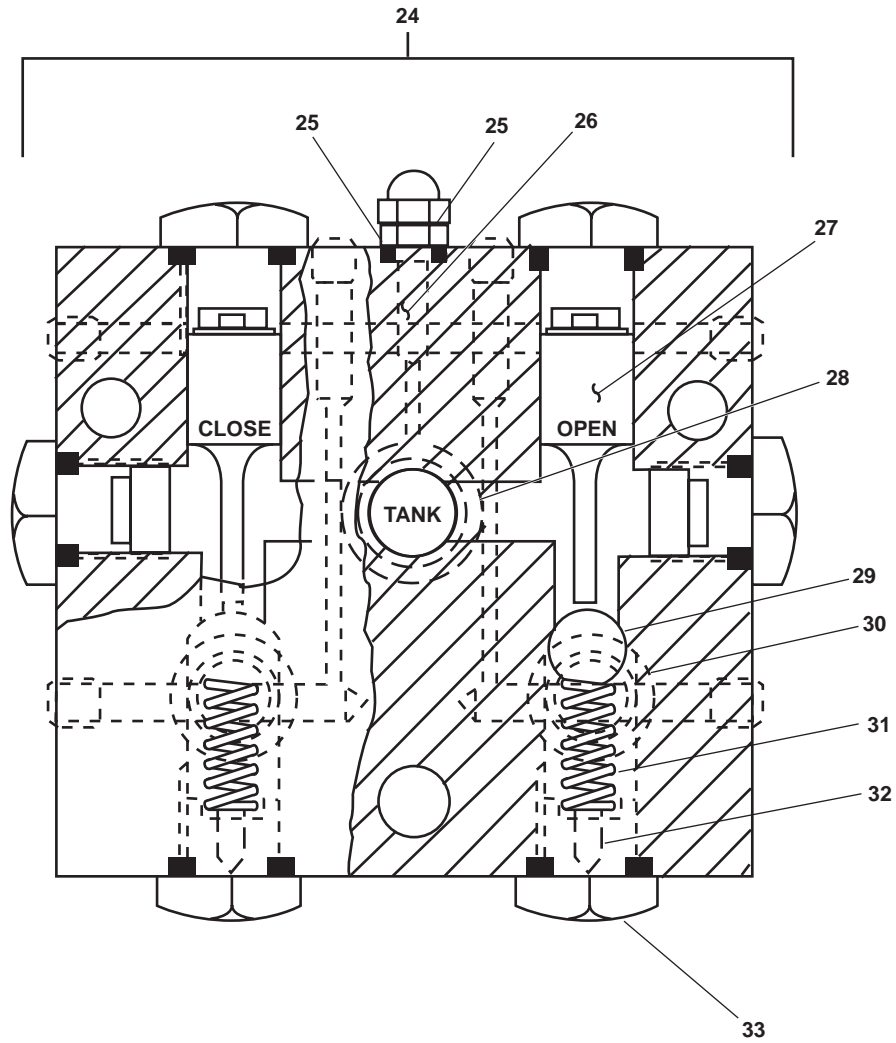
Hydraulic Watertight Doors (Sheet 6 of 9)
